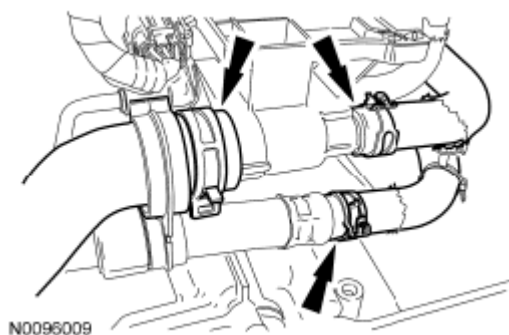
Locating Heater Hoses & Heater Hose In-Line Connector
